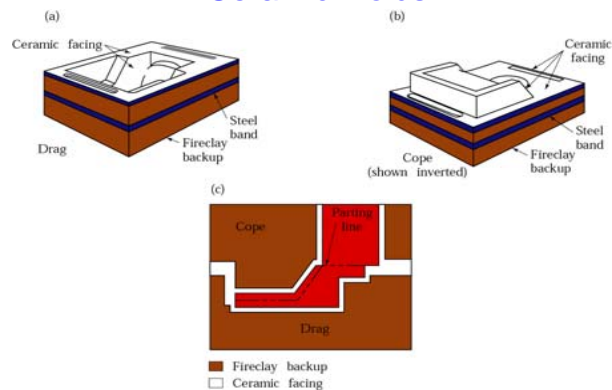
A typical ceramic mold (Shaw process) for casting steel dies used in hot forging. Source: *Metals Handbook*, vol. 5, 8th ed.
